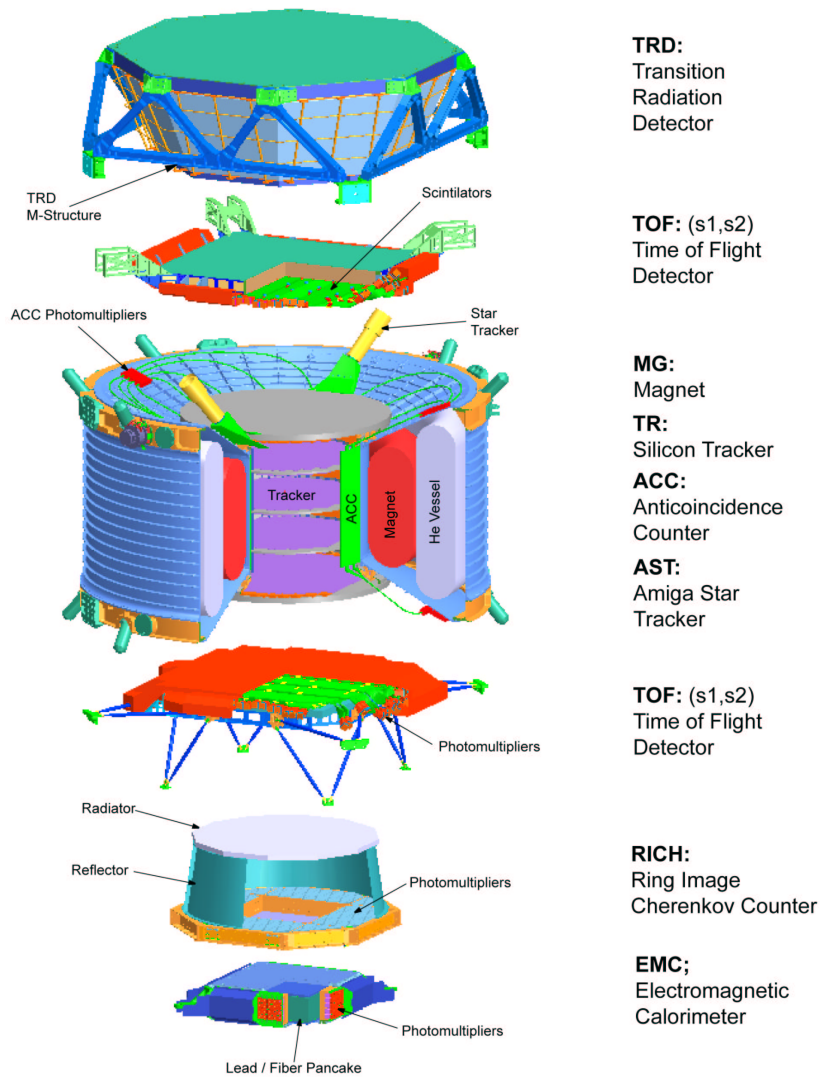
Schematic exploded view of the AMS-02 experiment on the ISS.
